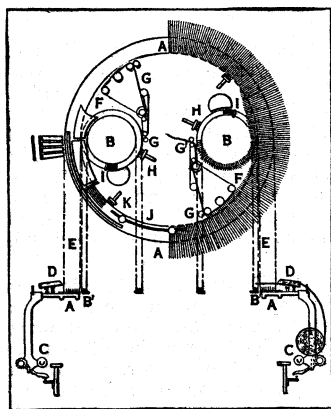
PLAN AND SECTION OF NOBLE COMB
